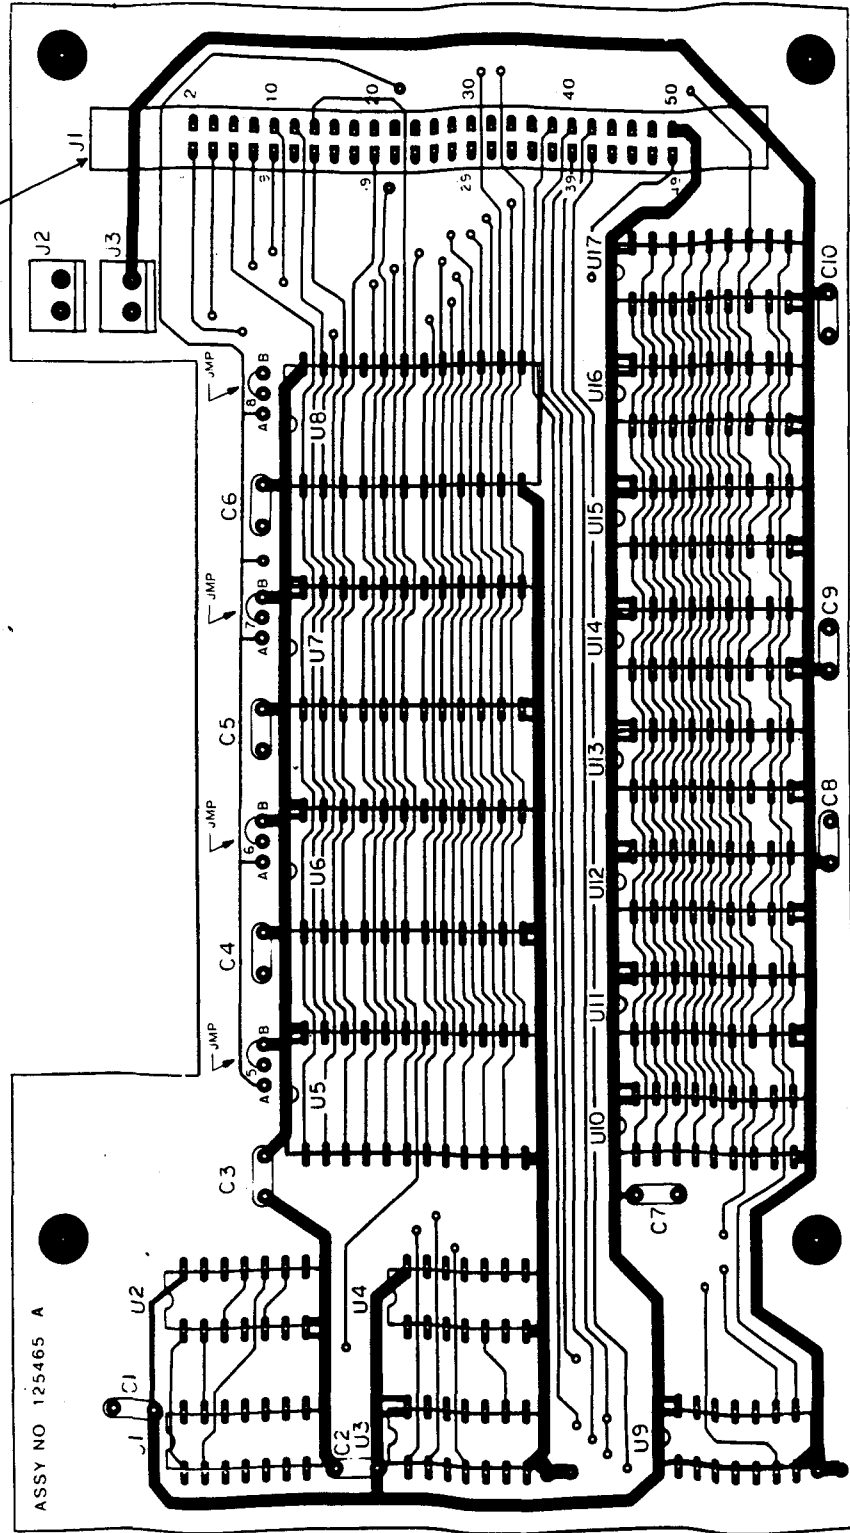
AS210-01A Memory Expansion Assembly, A5
